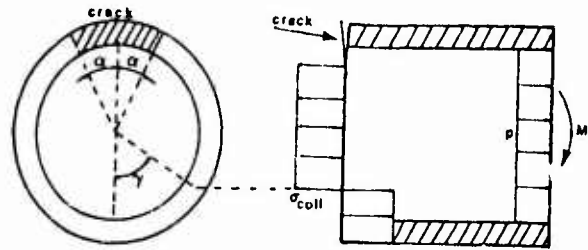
Failure by Collapse of Cracked Stainless Steel Pipe [1].
